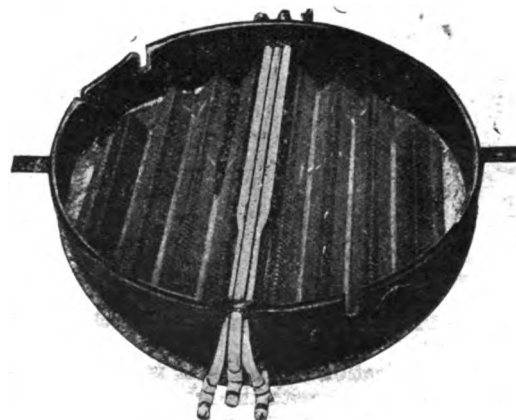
View of Burner, showing Raised Slotted Sections and Final Vaporising Tubes.
